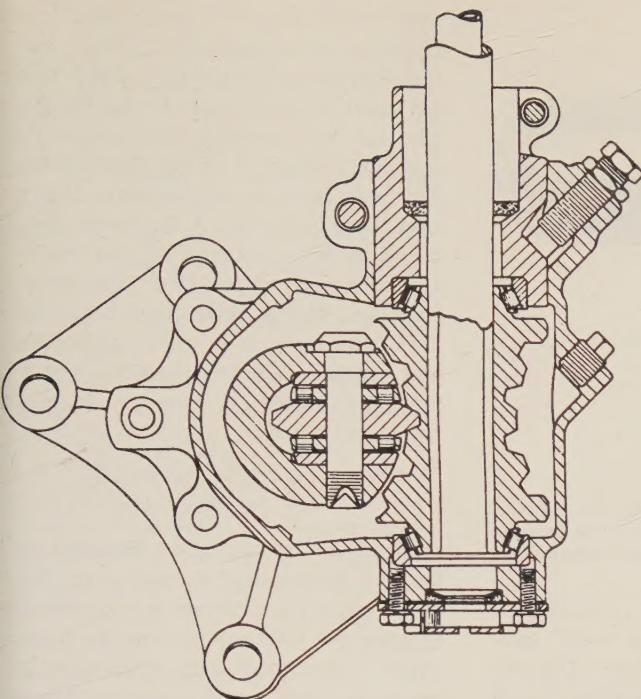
The hourglass-type worm gear combined with a roller tooth which was attached to the pitman shaft which, in turn, was connected to a steering arm. This gear's design reduced friction to levels below that in former types and made the steering gear box both smaller and more efficient.
